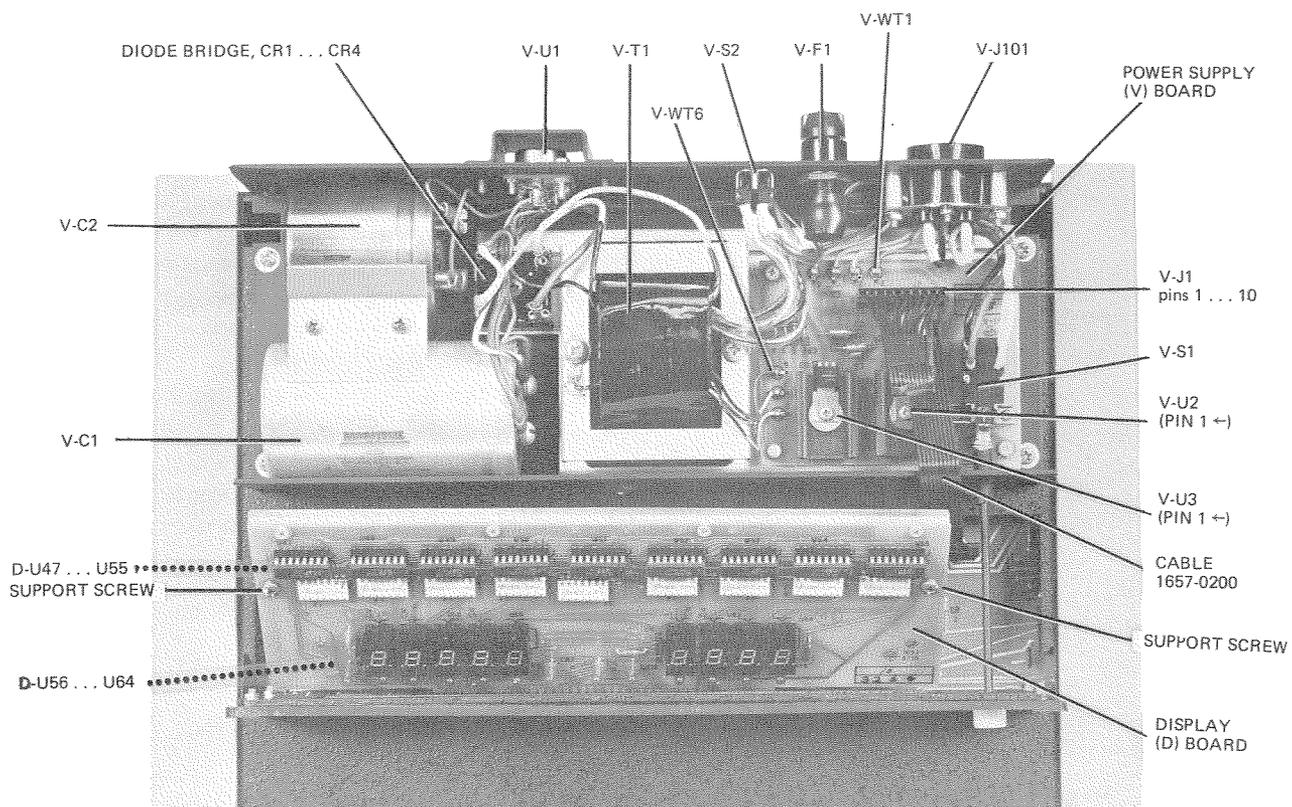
Power supply (V assembly) and display or DB board, shown in the instrument, with top cover off.
